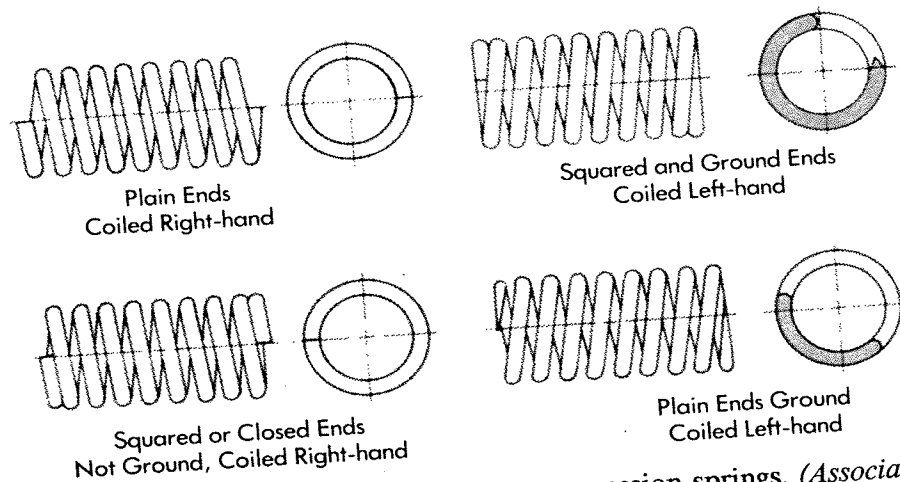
Types of ends for helical compression springs. (*Associated Spring, Barnes Group Inc.*)
